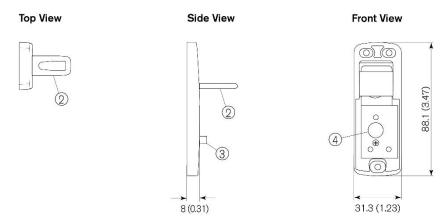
Dimensions of the GAT NET.Lock BoltSet 7100
